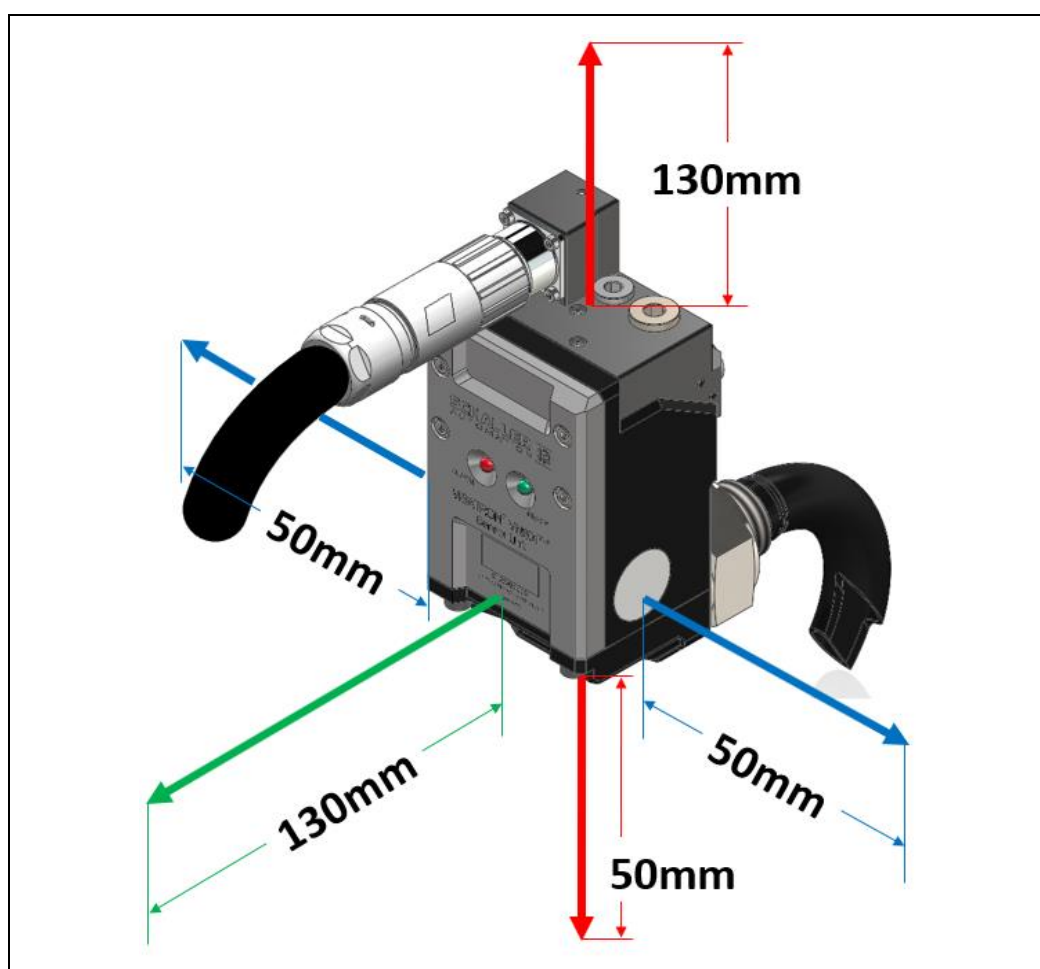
Installation space and dimensions for the “Horizontal” VN301^{plus} sensor unit
